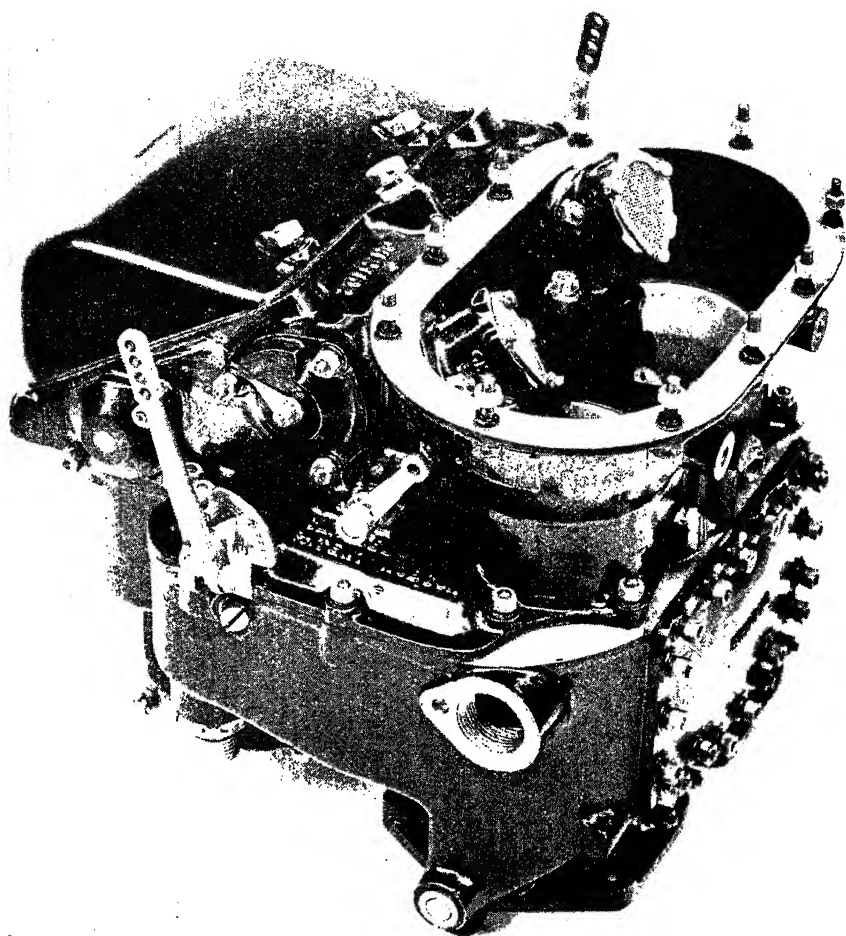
A TWIN MASTER CONTROL CARBURETTER, INVERTED TYPE.
